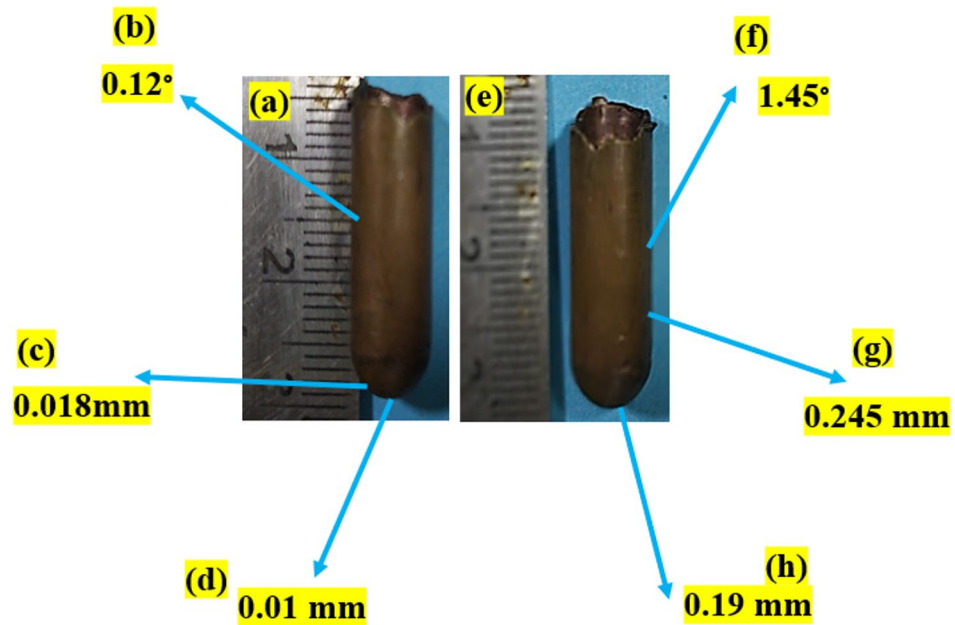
Springback measurement of the fabricated cup; (a) Worse, (b) Best conditions.
